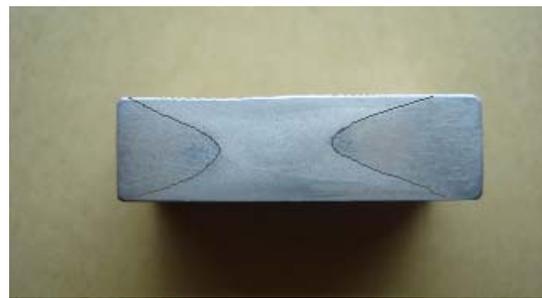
Macro Photo of the Weld Specimen Cross Section (X-Z) after Etching
